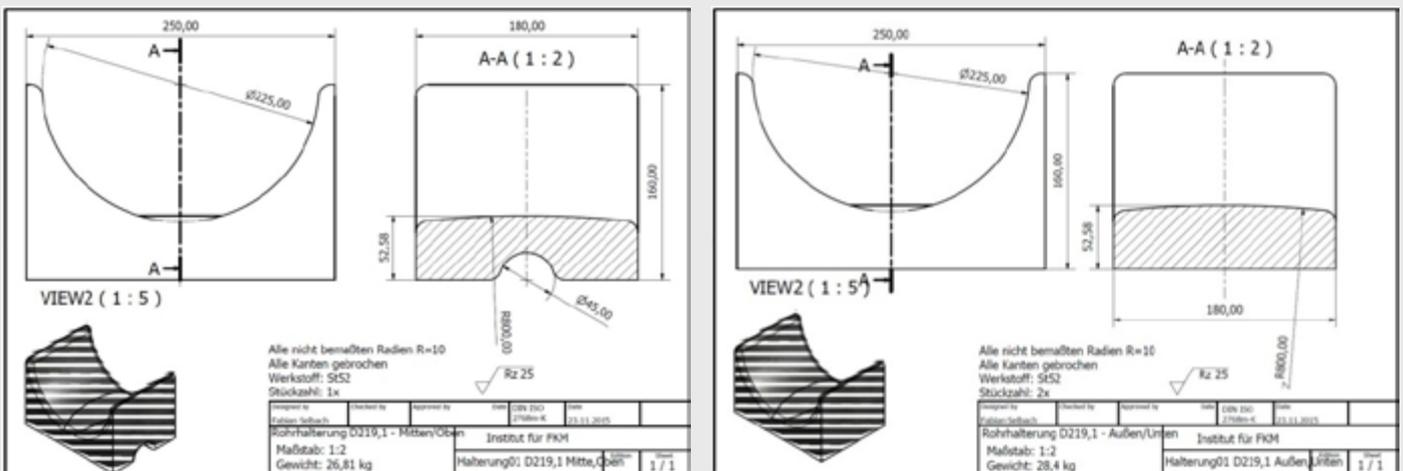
Bearing halves for bending tests on pipe size 219 x 12 mm
